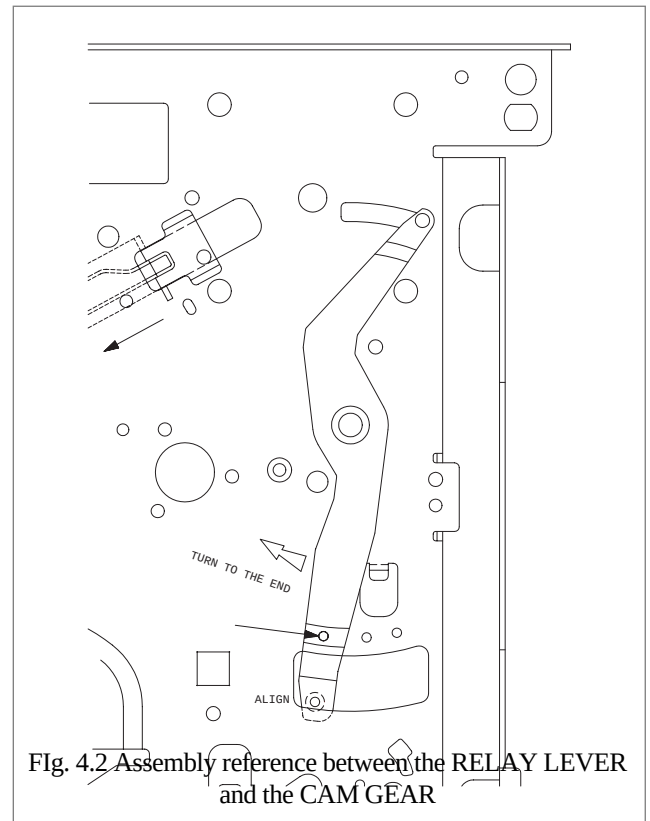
Assembly reference between the RELAY LEVER and the CAM GEAR
